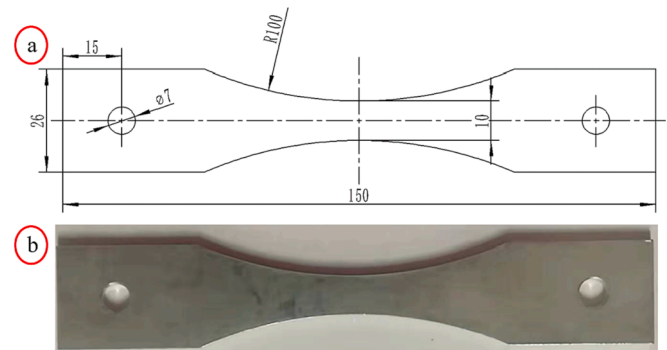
(a) Geometrical dimension of smooth specimen (all dimensions in mm) and (b) fatigue test specimen.
